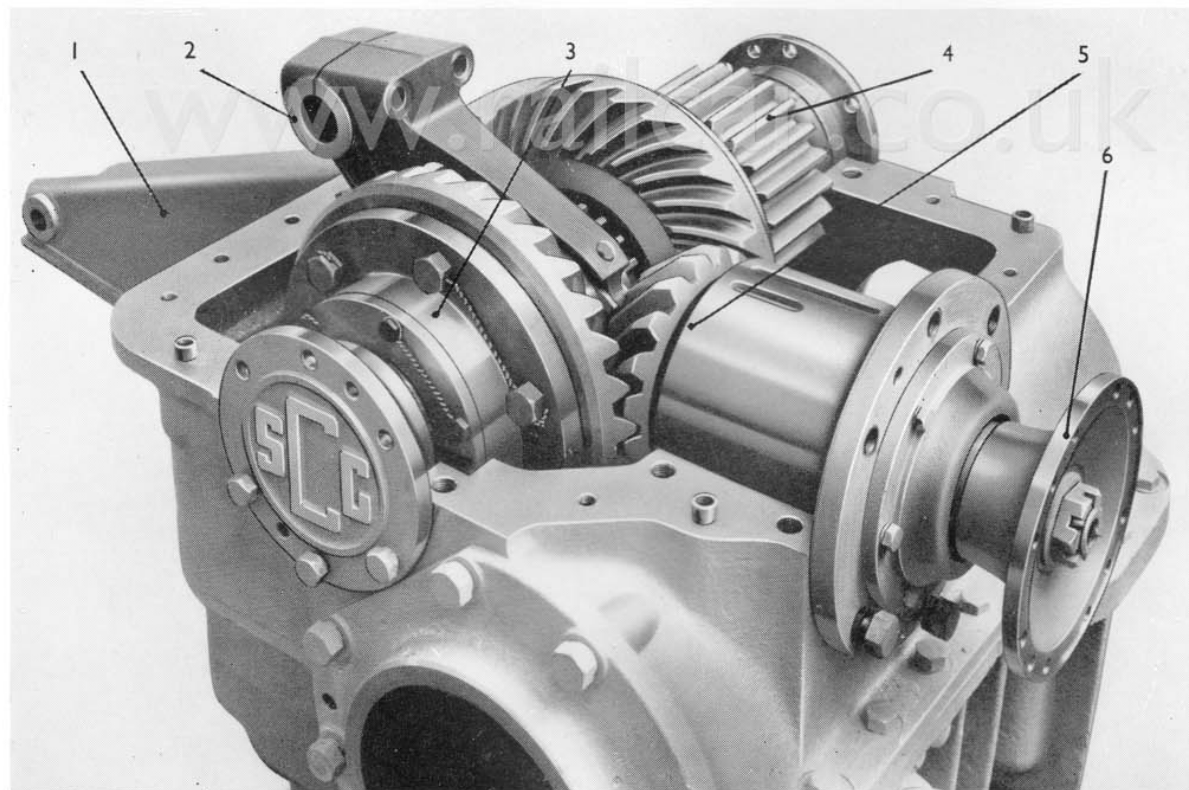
VIEW OF INPUT BEVEL AND TOP SHAFT SHOWING LOCATION OF DOG SHIFTING FORK
